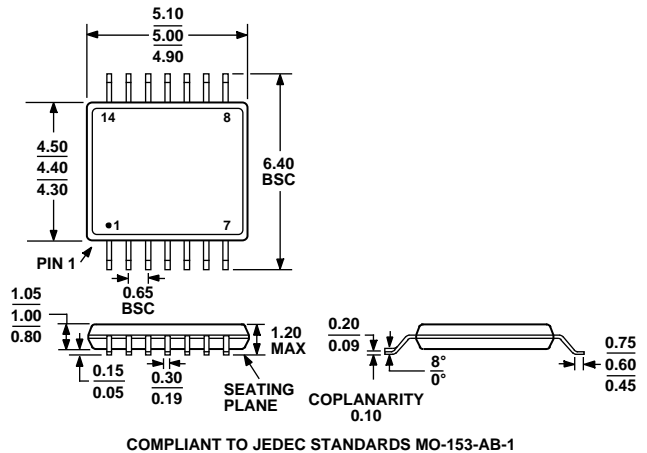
14-Lead Thin Shrink Small Outline Package [TSSOP] (RU-14)
